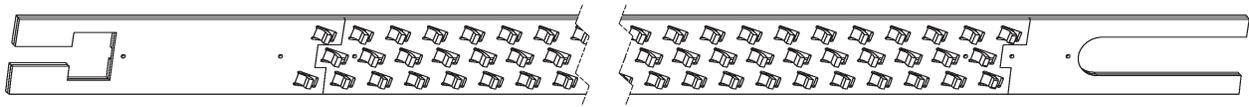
Steam generator tube support bar assembly (shown in a horizontal installation)
